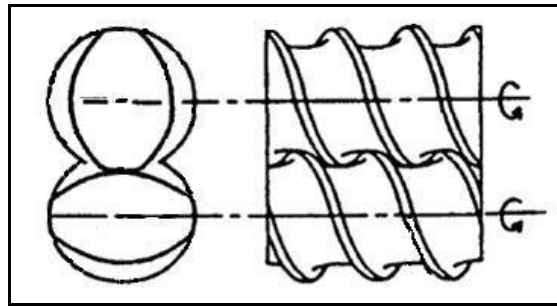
11. Screw geometry of a self-wiping co-rotating intermeshing extruder.
